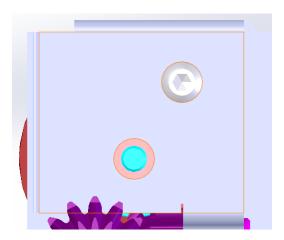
Holes for flange bearing of the shaft and assembly of top right screw.
